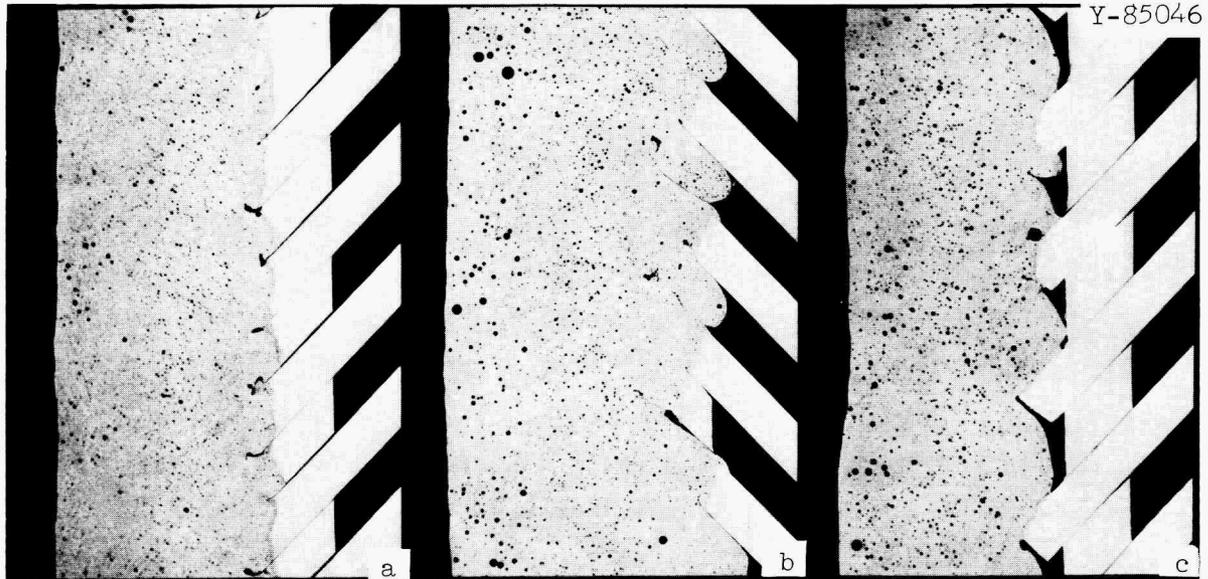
Weld Penetration, HFIR Fuel Element. (a) Satisfactory, (b) excess penetration, (c) lack of tie-in. 5 \times . Etchant: 1% HF.
